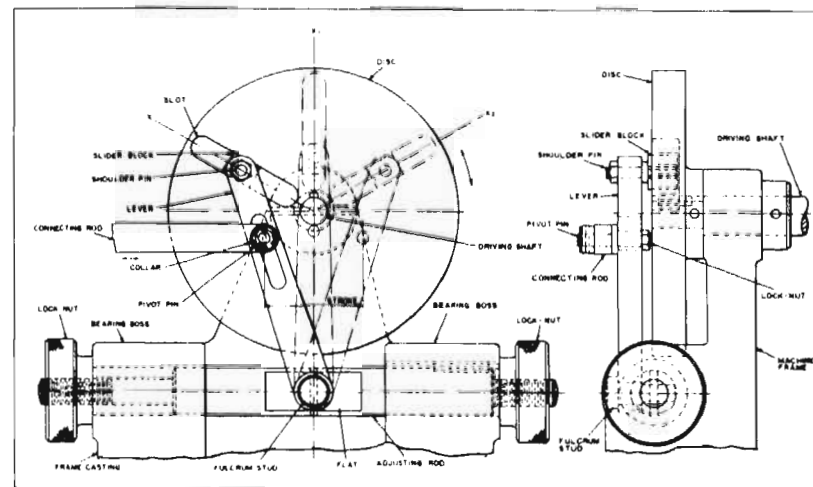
Mechanism designed to drive a former slide on a special wire-forming machine.
